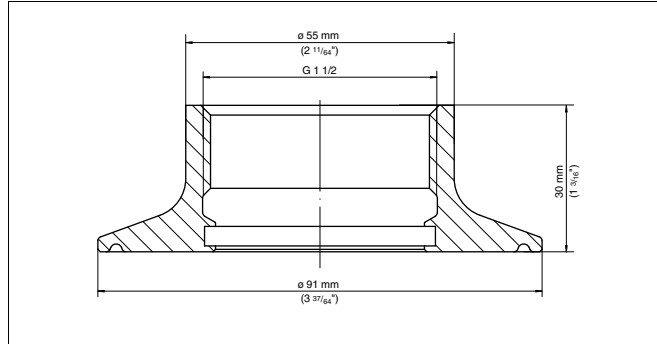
Dimensions adapter G1½ A according to DIN 3852-X on Clamp 3" PN16 (ø 77.5 mm) DIN 32676, ISO 2852/316L
